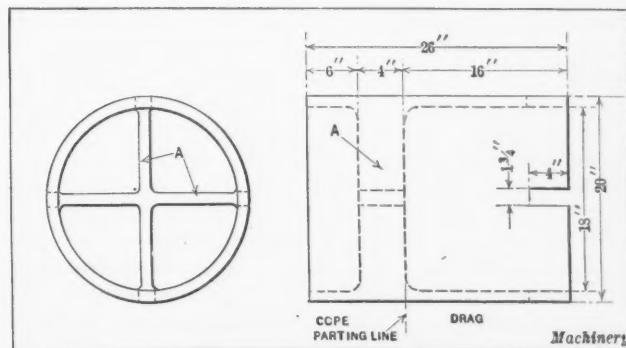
Casting which was produced more economically through a Change in Molding Methods
